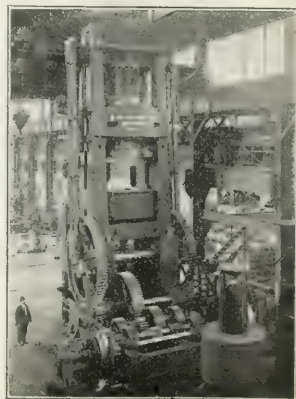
REAR VIEW OF PRESS, SHOWING GEARS
